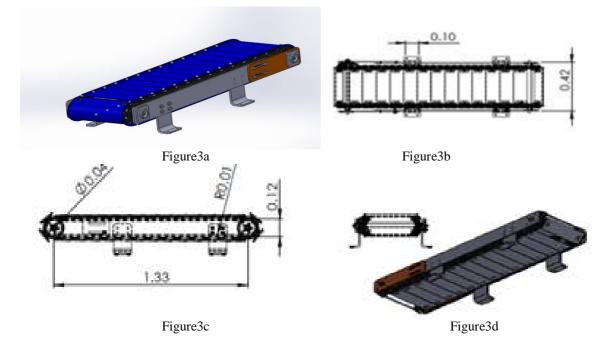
(a,b,c,d):Design and Dimensions of the Conveyor for 1m.
